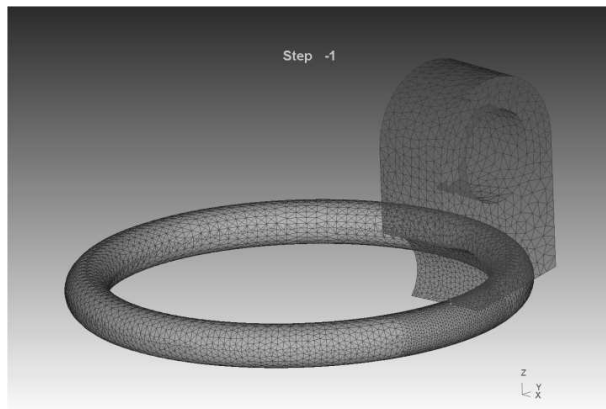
Modelling the flange with a ring and the meshing of the workpiece and the tool
